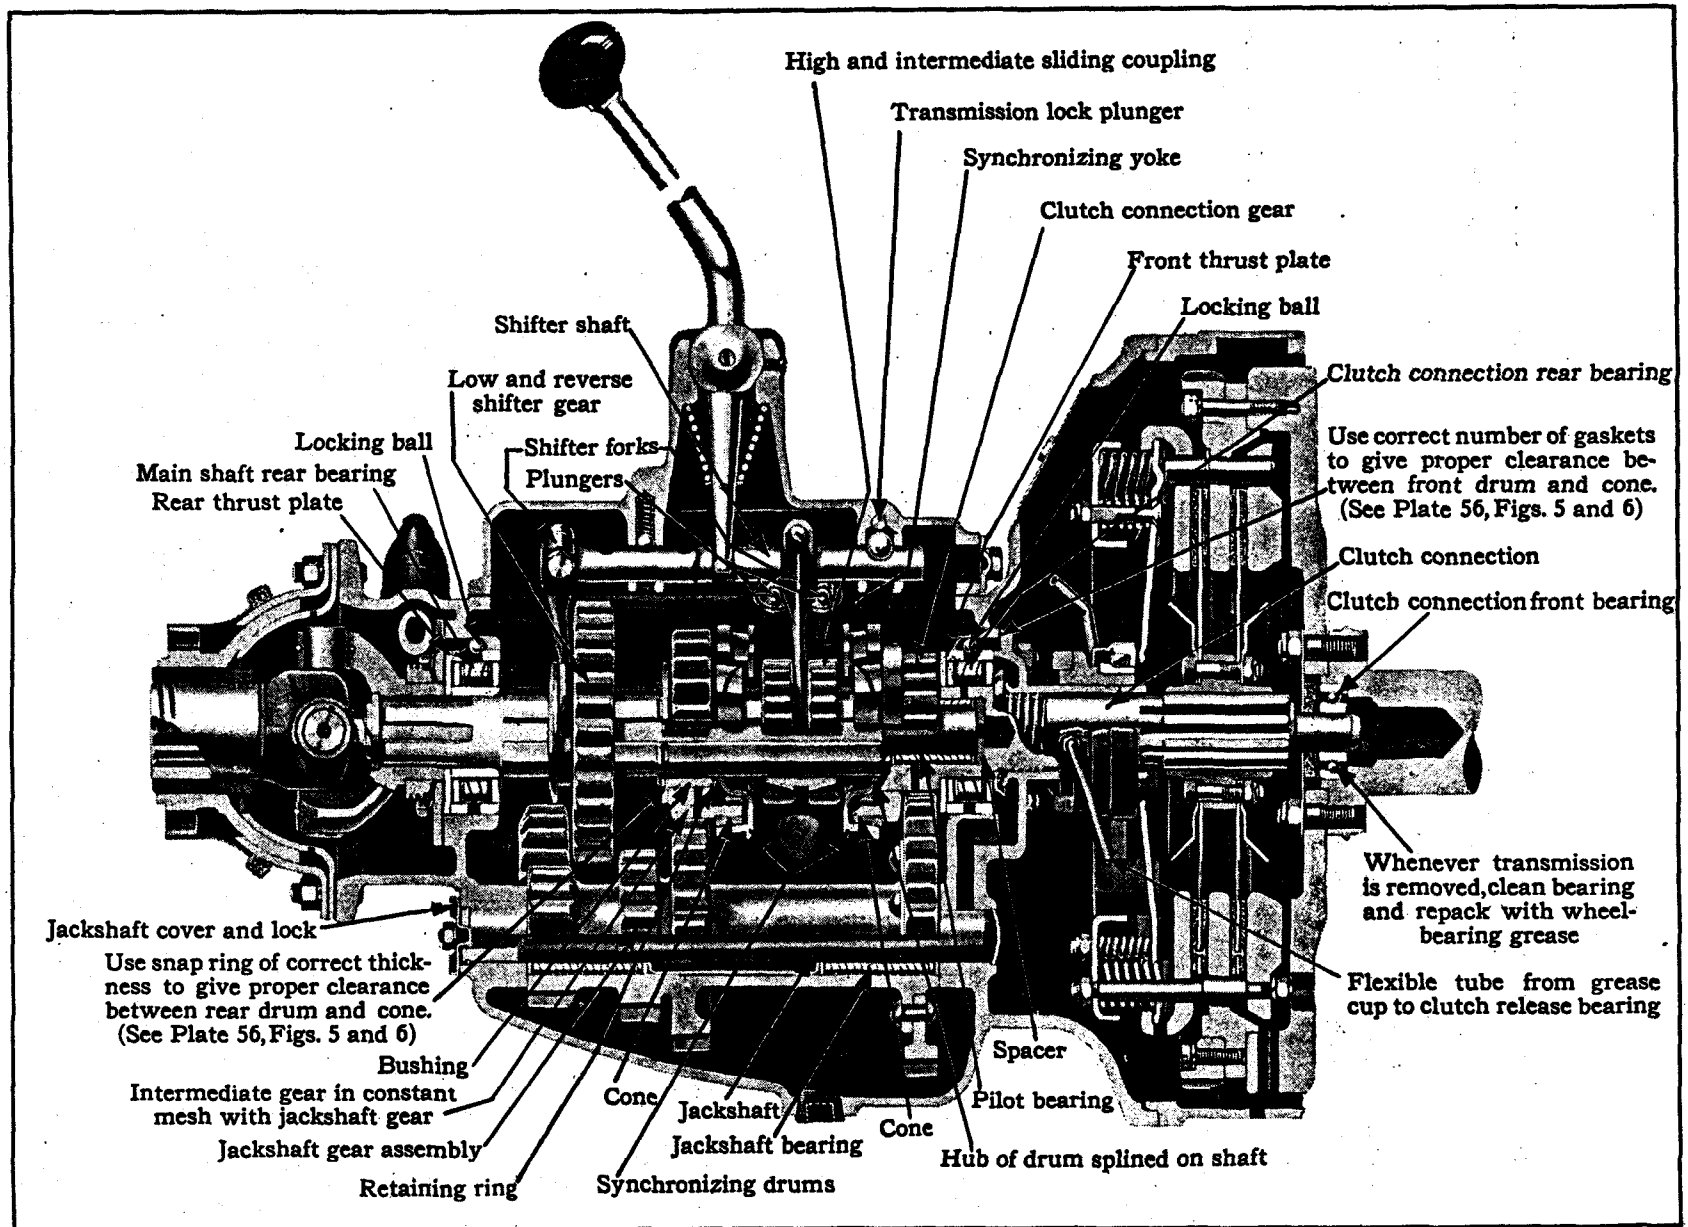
Sectional view of transmission, Cadillac 341-B and La Salle 328.
